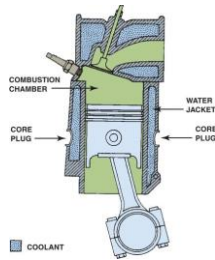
Coolant circulates through the water jackets in the engine block and cylinder head.
